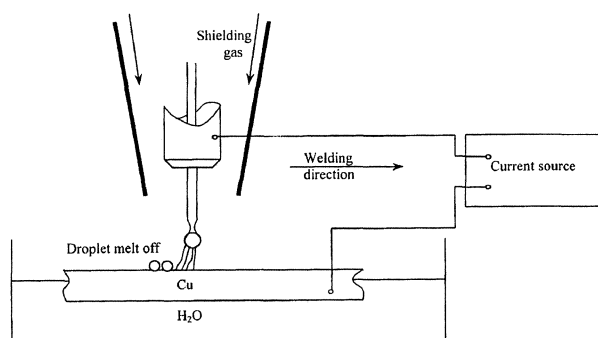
Schematic of the device for MAG/MIG welding with the 18/8/6 wire on water-cooled copper plate for an analysis of manganese burn-off in welding arc.
